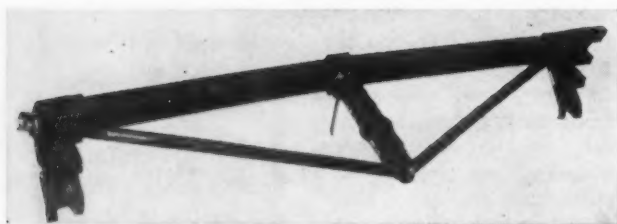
MALLEABLE-IRON BRAKE HEADS AND FULCRUM IN RAILROAD BRAKE-BEAM ASSEMBLY
